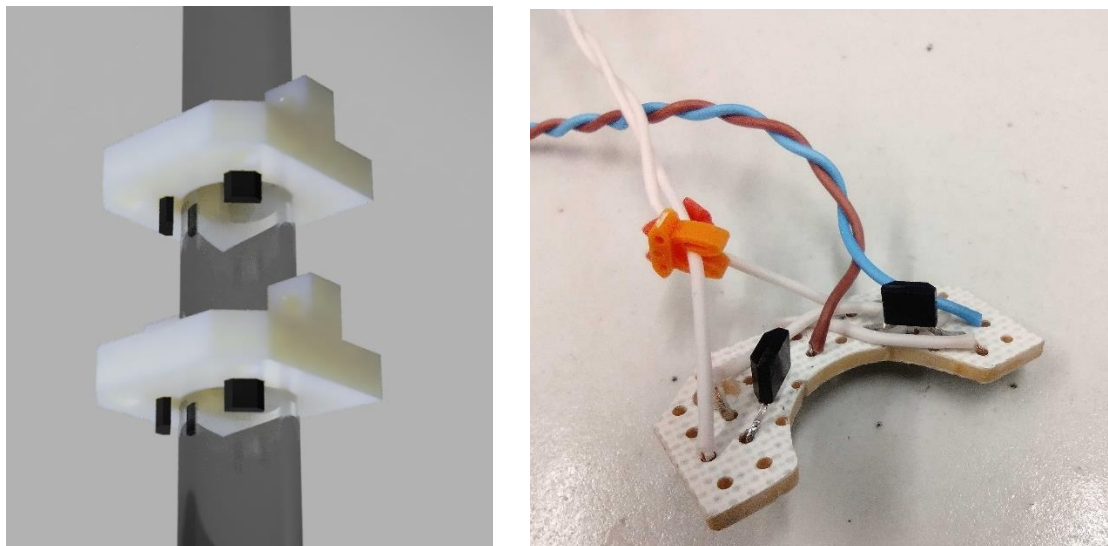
Left: 3D-designed drawing of the Hall-effect sensor holders. Right: Pair of Hall-effect sensors soldered to a prototype PCB board with a cut allowing to accommodate 1/2" PFA column.
